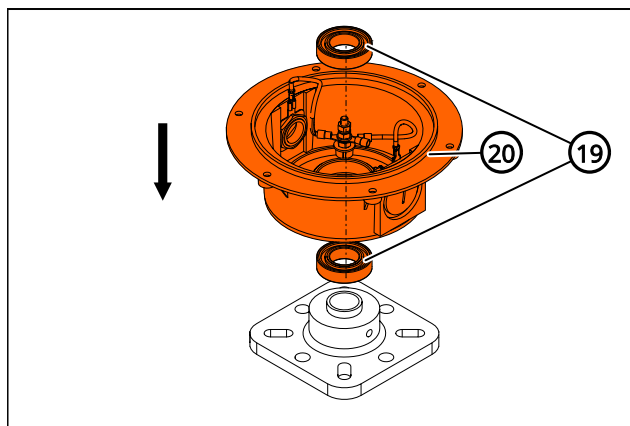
Ensure that the bearing flange is completely free of dust and grease. Carefully place the two new deep groove ball bearings in their positions.
